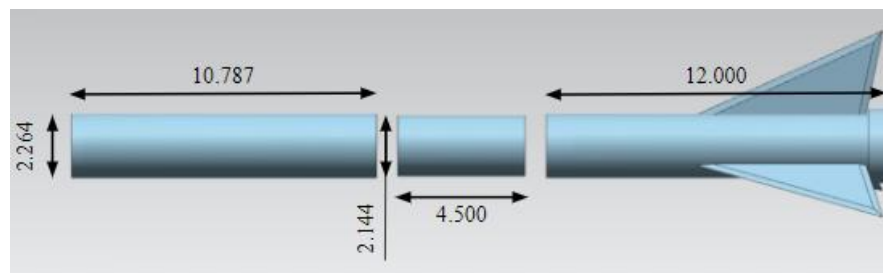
Middle Body Tube, Lower Coupler and Lower Body Tube with Dimensions (inches)
